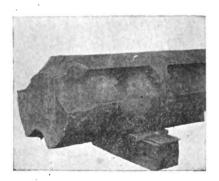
Broken Rolling Mill Steel Wabbler Courtesy of C. & C. Electric and Manufacturing Company
